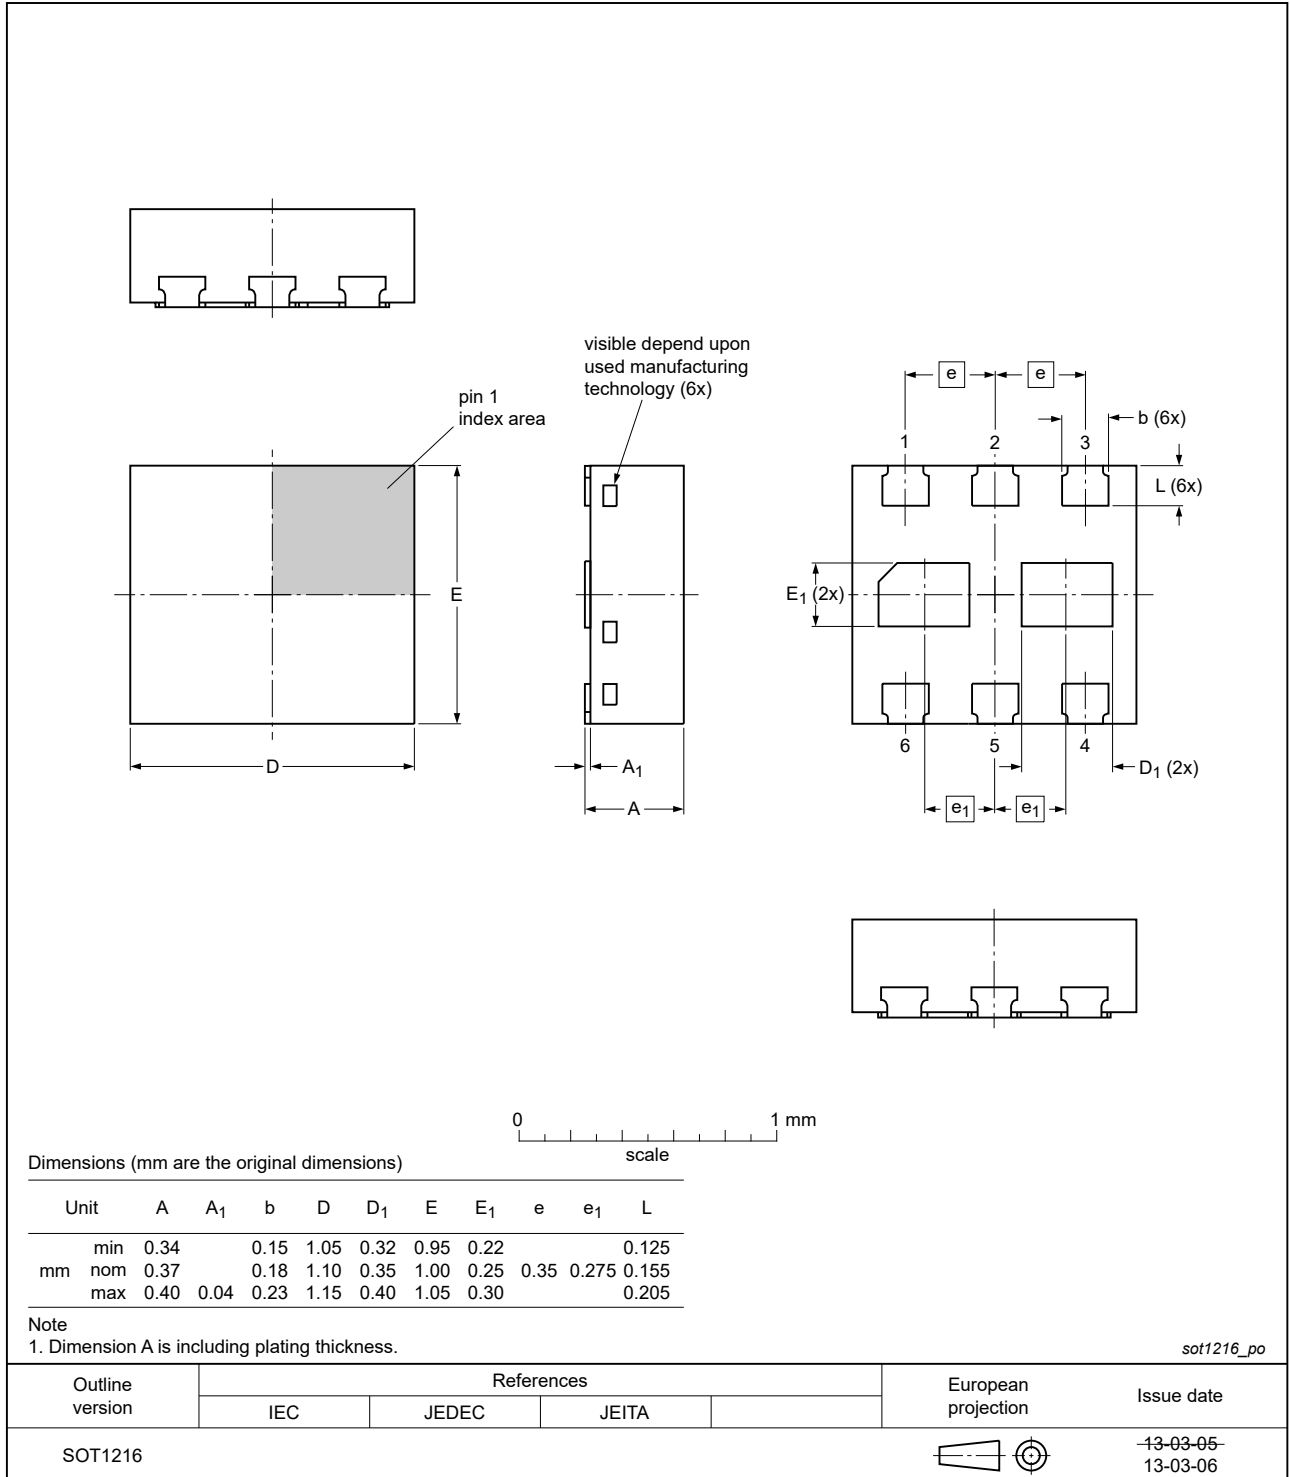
Package outline DFN1010B-6 (SOT1216)
